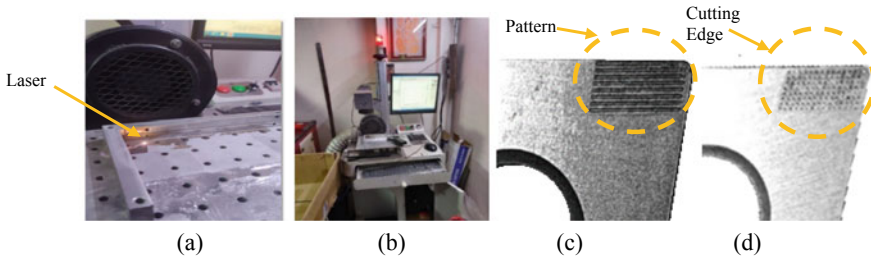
a Laser process, b laser machine and control unit, c sample insert 1, d sample insert 2
